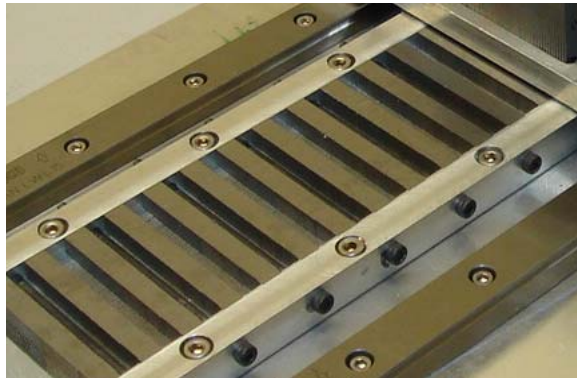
Grinding the iron plate surface to keep constant air gap.
